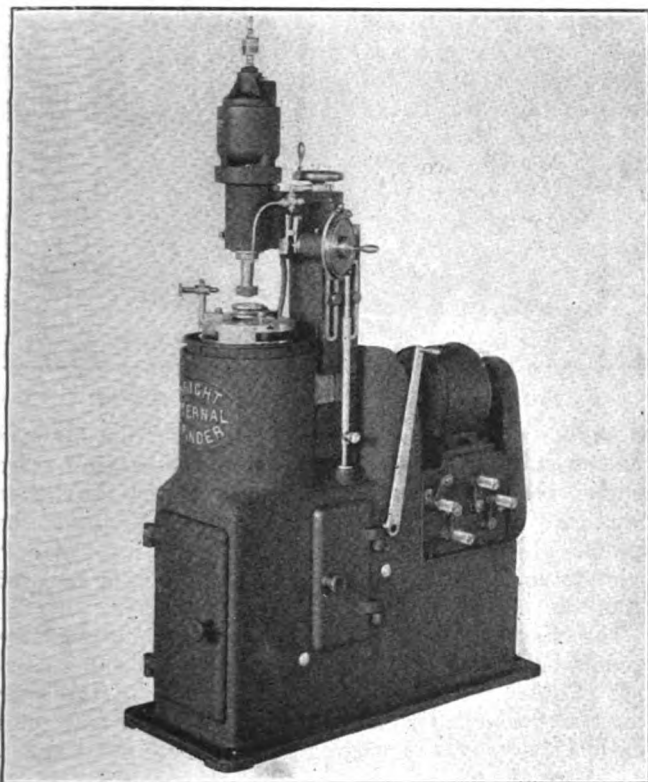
BRIGHT INTERNAL GRINDING MACHINE
